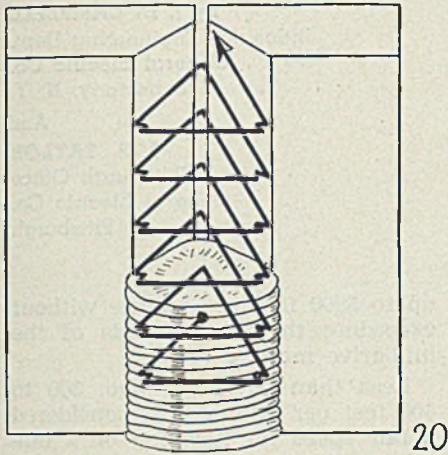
Weave for laying in heavy bead to make weld in Fig. 19, requires electrode that gives built-up bead similar to that used for bead in Fig. 15
